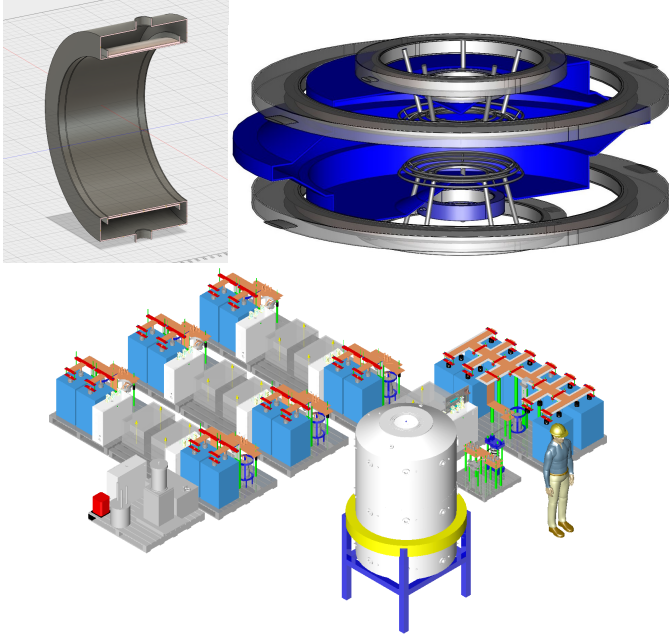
TOP LEFT: Coil design point - actively cooled, in-vacuum component. TOP RIGHT: all in-vacuum coils, support structure and passive stabilizers - for scale, outer coil is 1m diameter. BOTTOM: full system layout for banks, and vacuum chamber.
